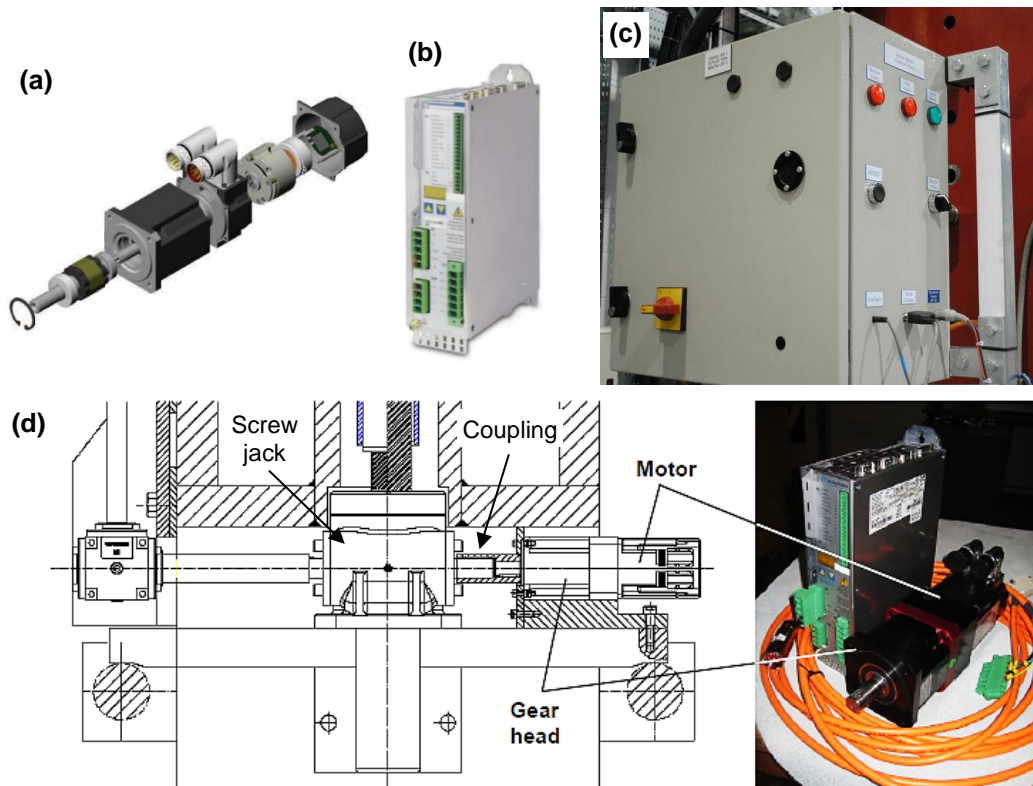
A motor driven system of billet feeding (a) Kollmorgen AKM Synchronous AC servo motor with a 50:1 gear ratio gearhead, (b) SERVOSTAR S300 servo drive, (c) control cabinet to power the servo motor and interface with the I-ECAP rig and (d) cross-section showing how the motor is coupled to screw jack worm shaft.
